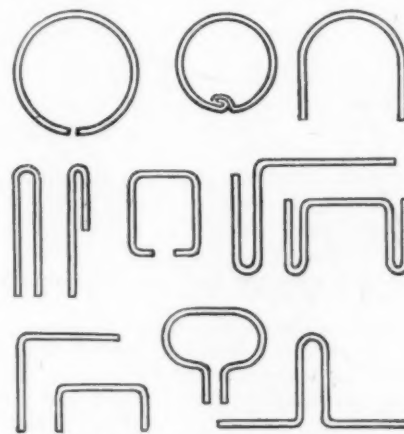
THE WORK OF THE ABOVE MACHINE.
